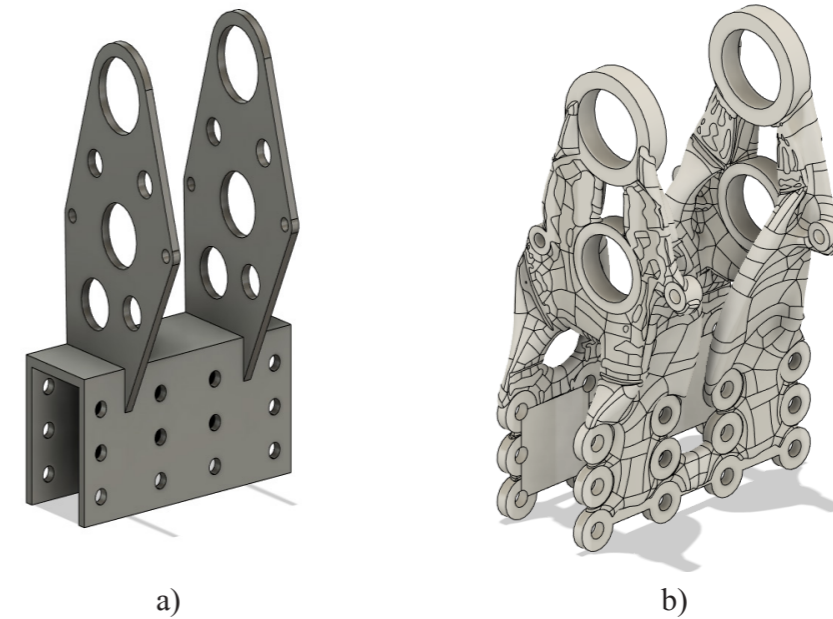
Motor mounting brackets: a) Sheet metal – laser machine with numerical control; b) Generative design – 3D printing
